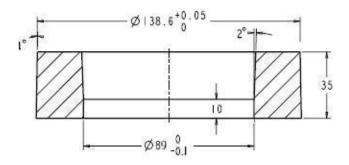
Technical Drawing of the Lower of Blanking Die
